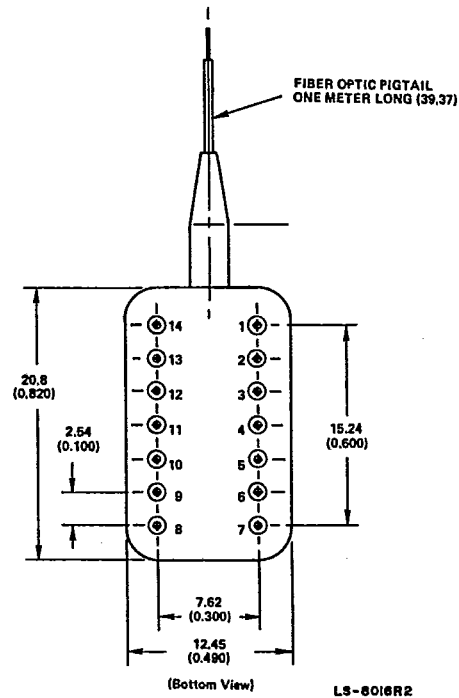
Dimensional Outline - C30997-XXXQC-YY
